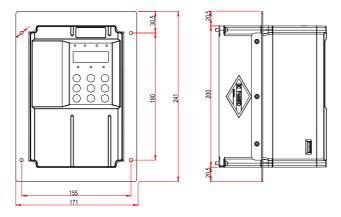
External dimensions and mounting dimensions of 45–160 kW AC drive models
